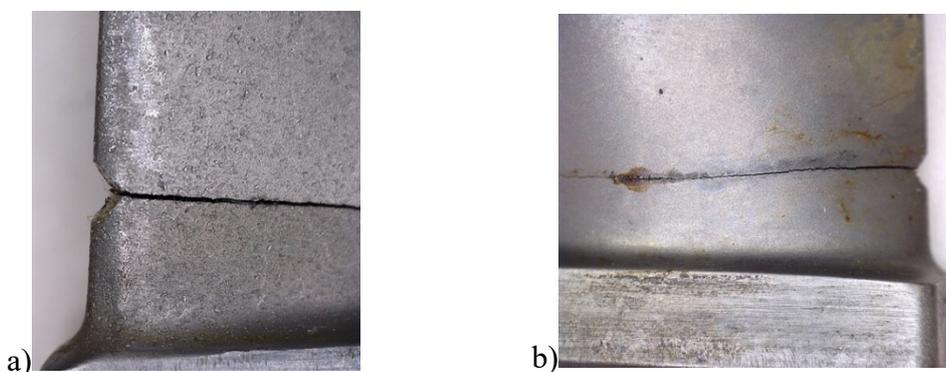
View of the fatigue crack on the internal-concave (a) and external-convex side (b) of the blade
